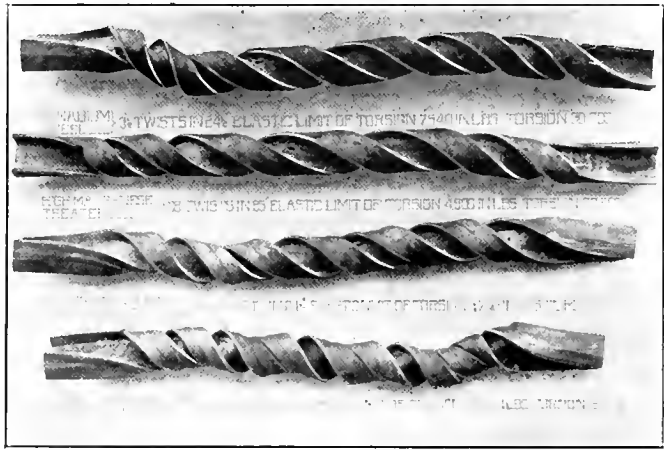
Axle Steel Samples showing Difference in Physical Qualities. Length, 52 inches; Depth, 2 inches; Width, 11-2 inch; Thickness of Flanges, 3-16 inch at Edge, 3-8 inch at Web; Thickness of Web, 3-16 inch.
